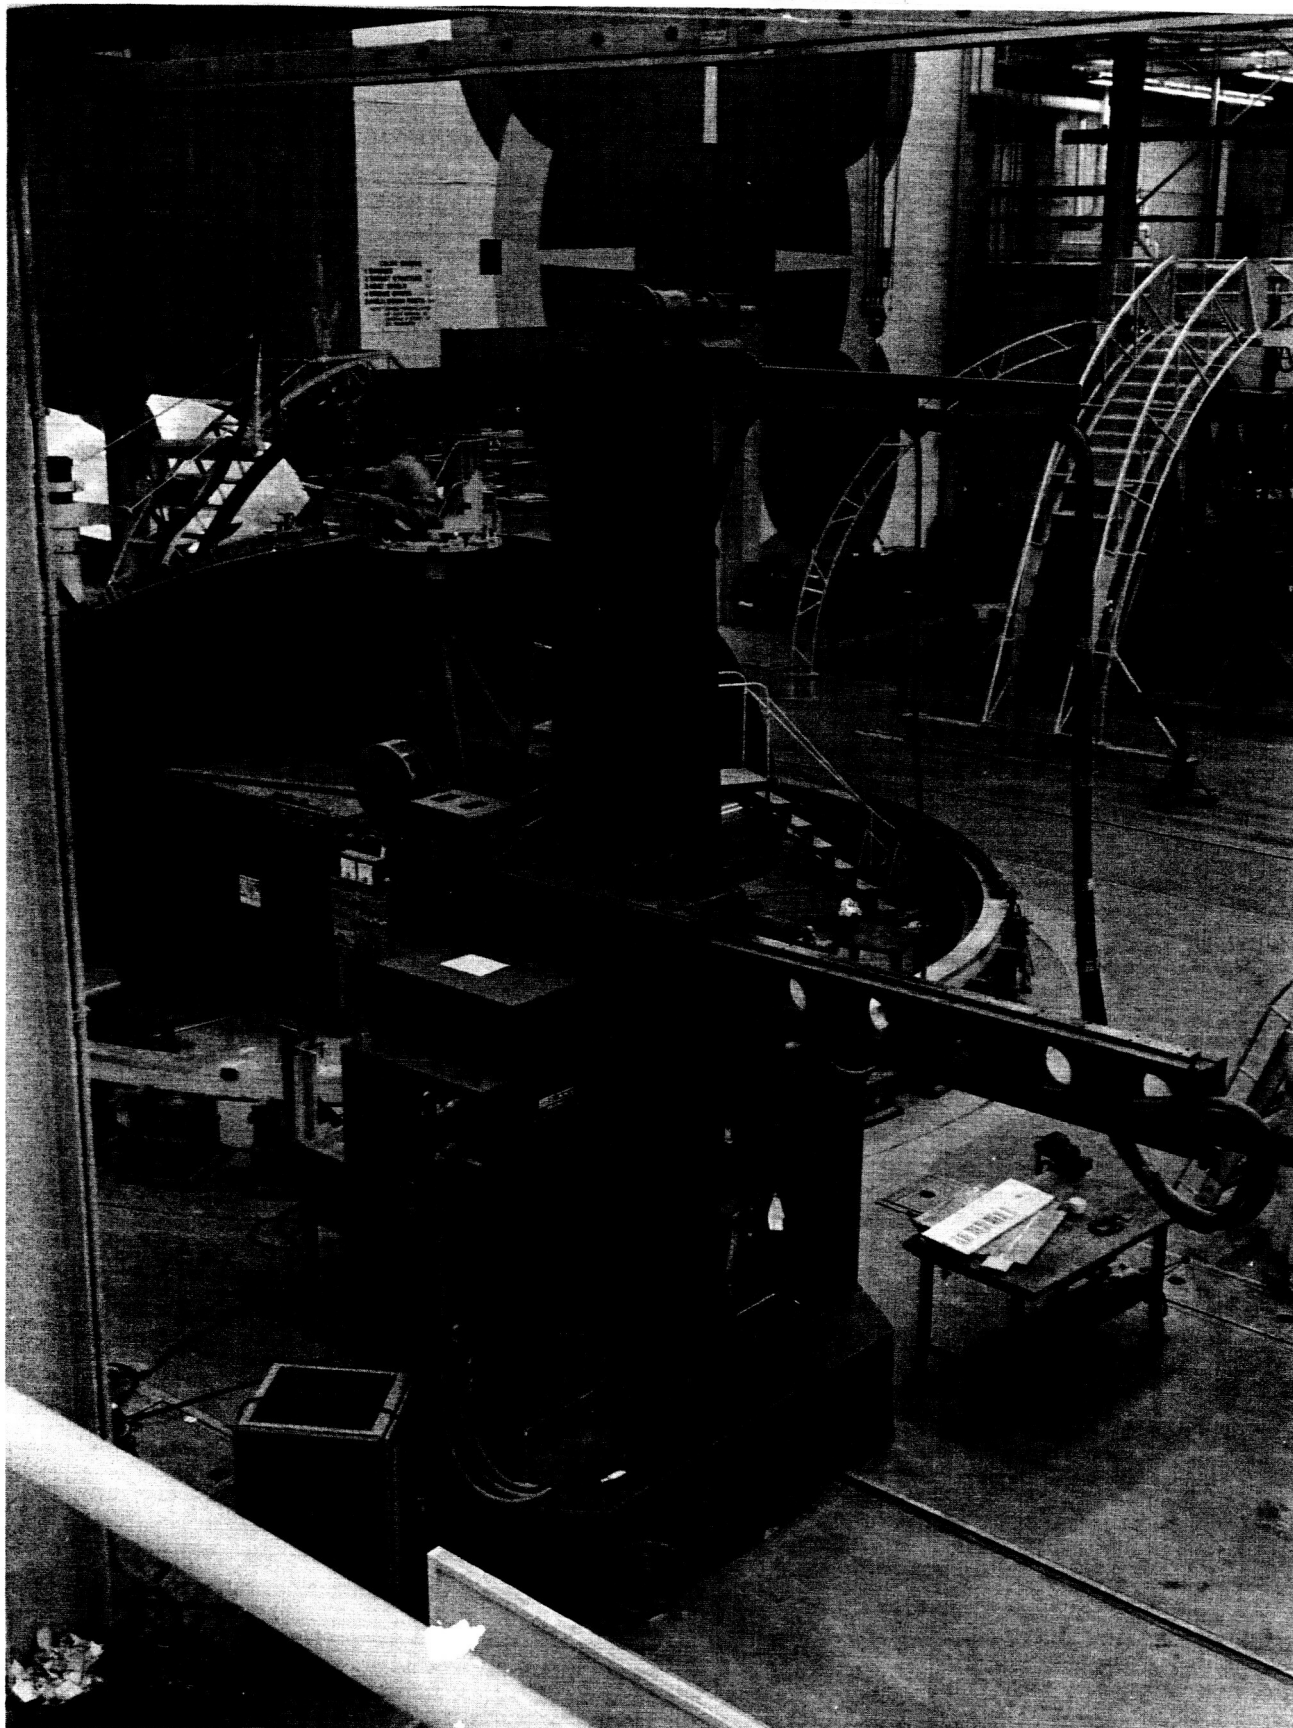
Sciaky Welder with Self-Contained Boom
